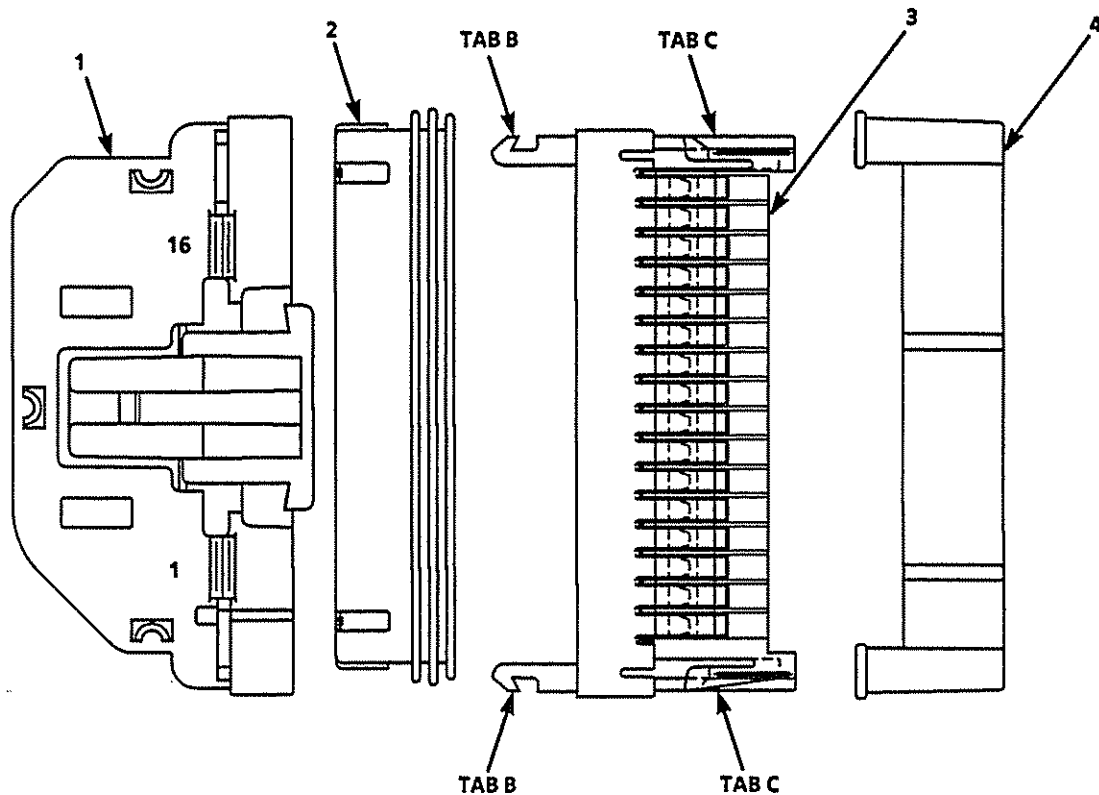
FIGURE A - EXPLODED VIEW OF CONNECTOR ASSEMBLY
